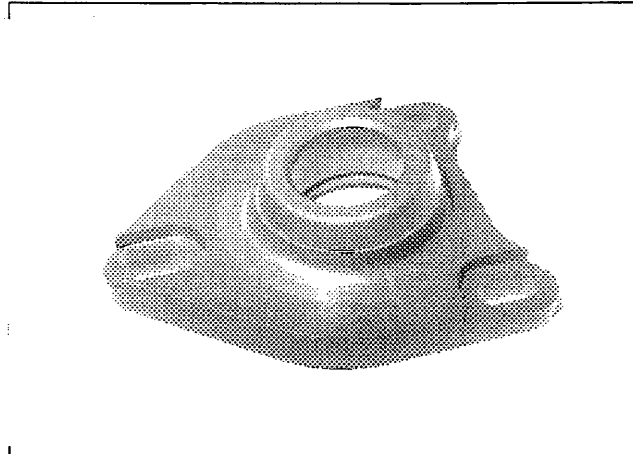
REAR REINFORCED TOP MOUNTING PLATES
